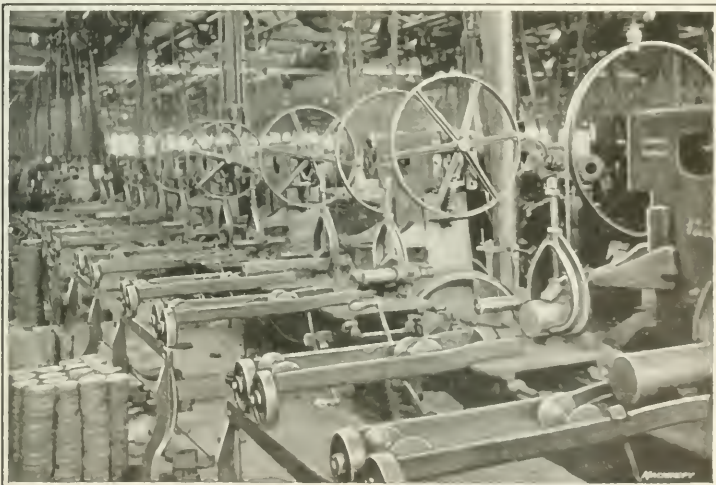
Group of Duplex Band Sawing Machines used in the U. S. Ball Bearing Mfg. Co.'s Plant for cutting off Bar Stock for Ball Bearing Rings when only a Small Number of One Size is required
